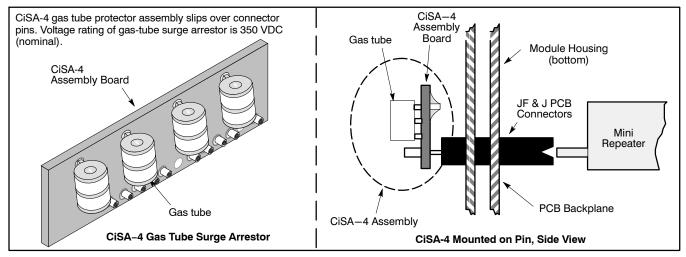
CiSA-4 Gas Tube Surge Arrestor Assembly, Configuration and Mounting
